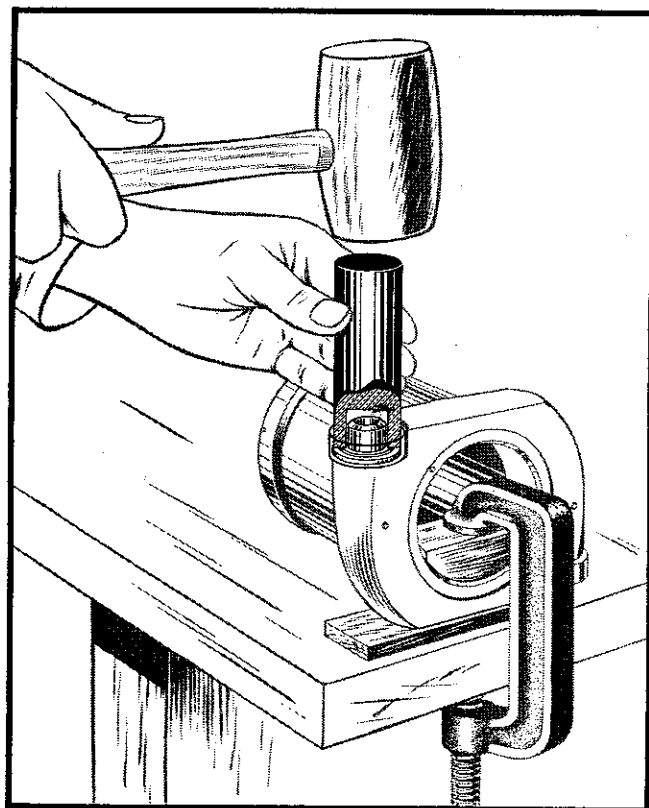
Installing Counterweight Thrust Bearing Inner Race
